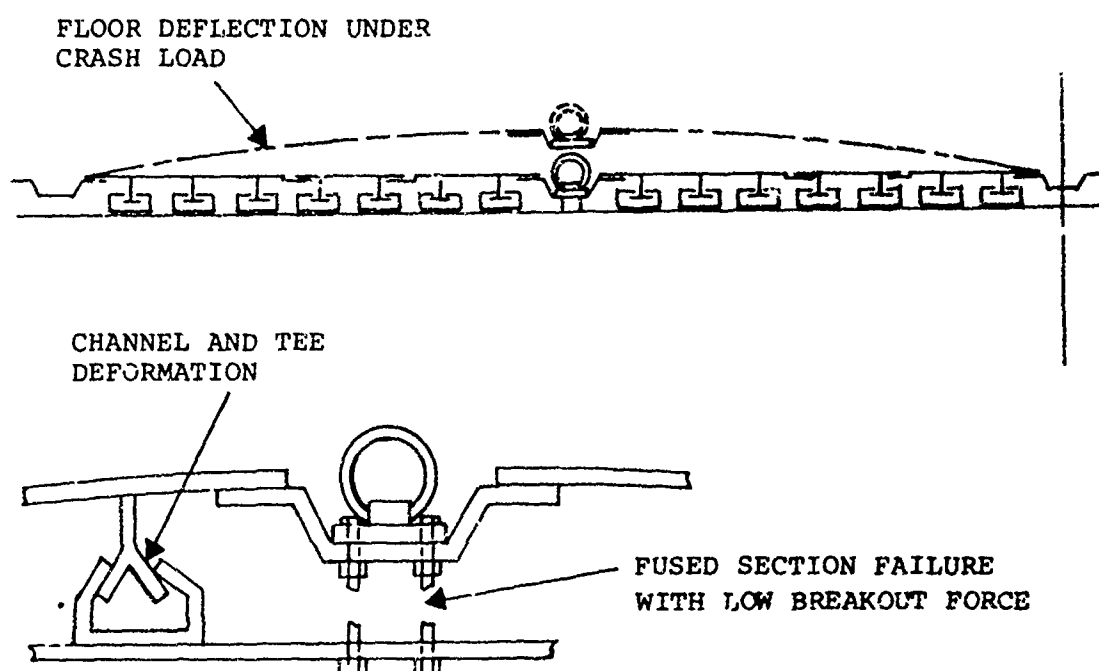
System 13 - Subfloor Structures for Load Attenuation.
